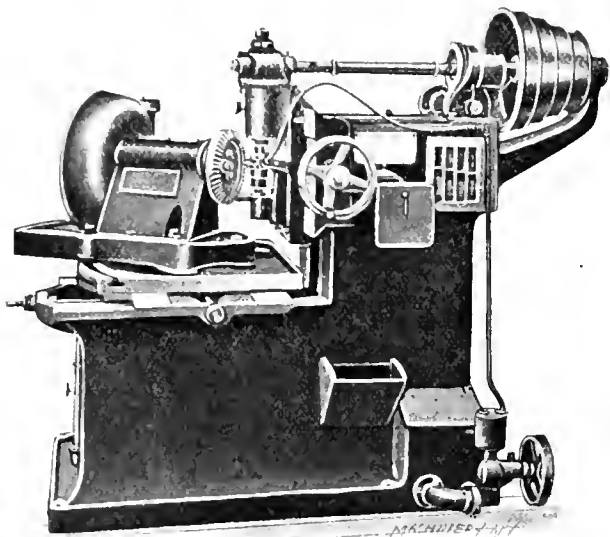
The Chambon Bevel Gear Hobbing Machine as Developed by the Oerlikon Co., particularly adapted for Roughing Bevel Gears Preliminary to Planing.
